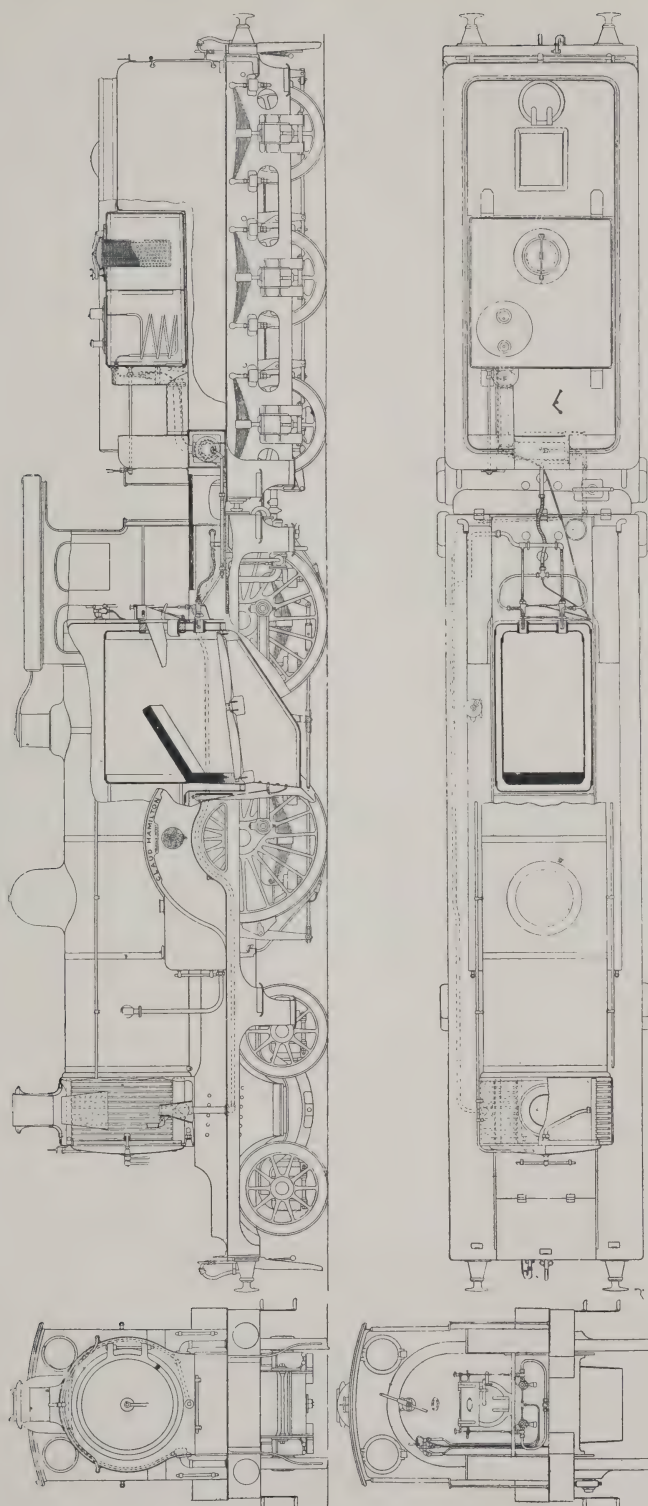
GREAT EASTERN RAILWAY 4-COUPLED BOGIE EXPRESS ENGINE FITTED TO BURN OIL FUEL. HOLDEN'S PATENT.
